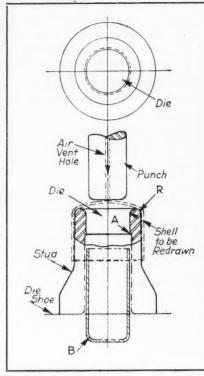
Non-ferrous sheet metal shells can be redrawn by turning them inside out in a simple redrawing die as shown here.
